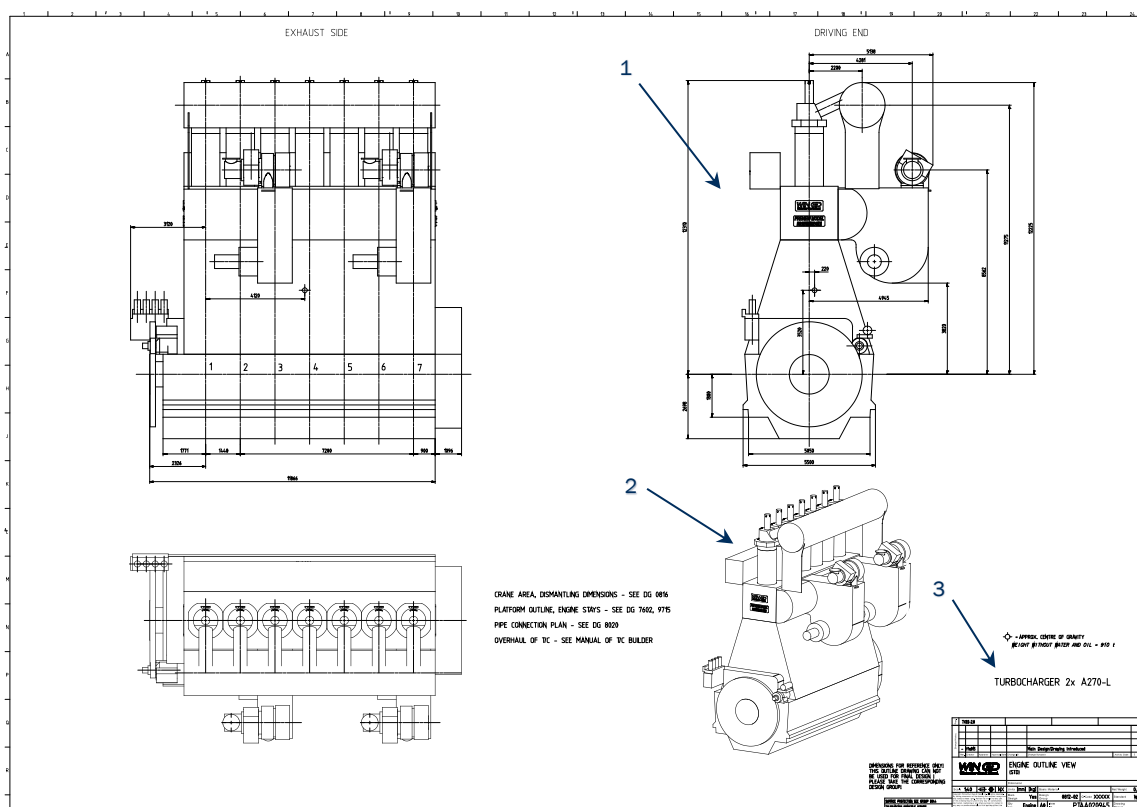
Example drawing of a new Engine Outline View (DG 0812-02) for a 7X82-2.0 (2xA270-L)
